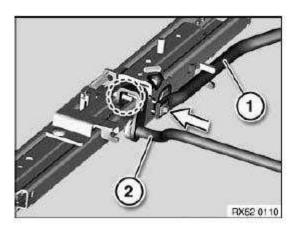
Removing Seat Rail From Adjusting Bracket Courtesy of BMW OF NORTH AMERICA, INC.
